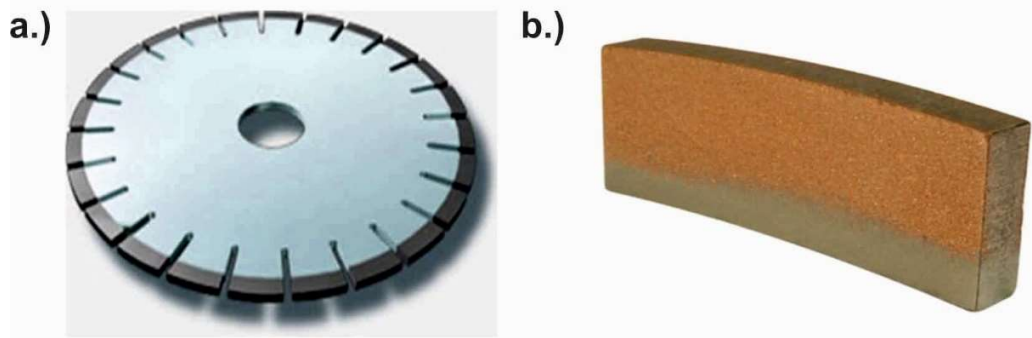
Diamond tools manufactured by FAST/SPS a.) Diamond tool saw blade b.) Diamond tool segment with diamond-less area (Courtesy of Dr. Fritsch GmbH).
